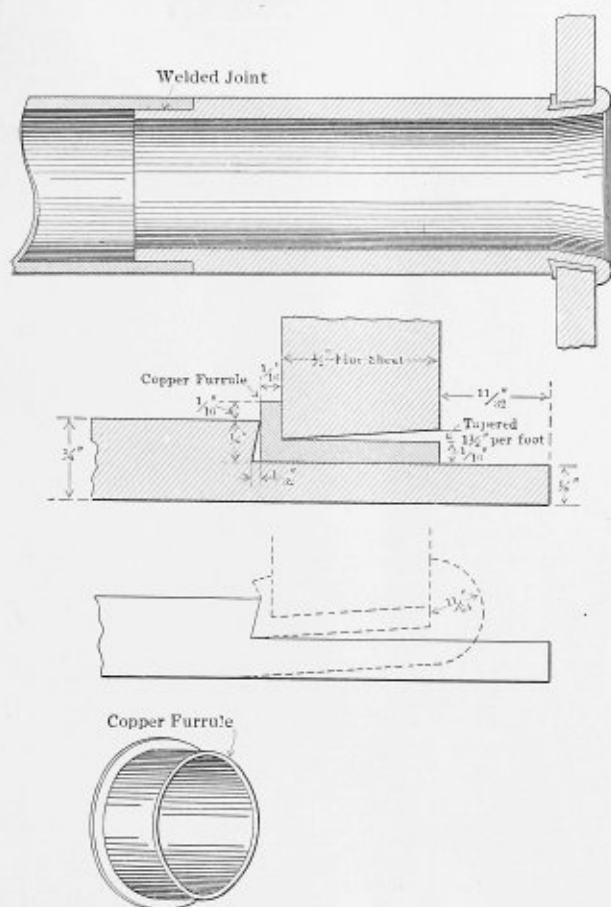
Sharp Shoulder on the Tube Makes it Impossible for Tube to Move in Sheet
